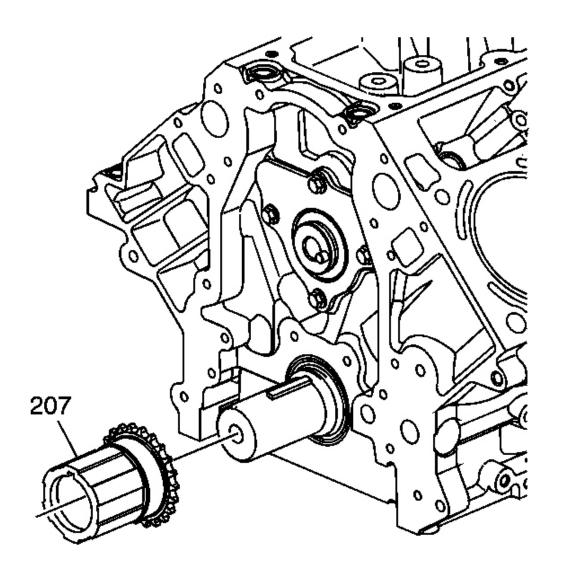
View Of Crankshaft Sprocket Courtesy of GENERAL MOTORS CORP.
